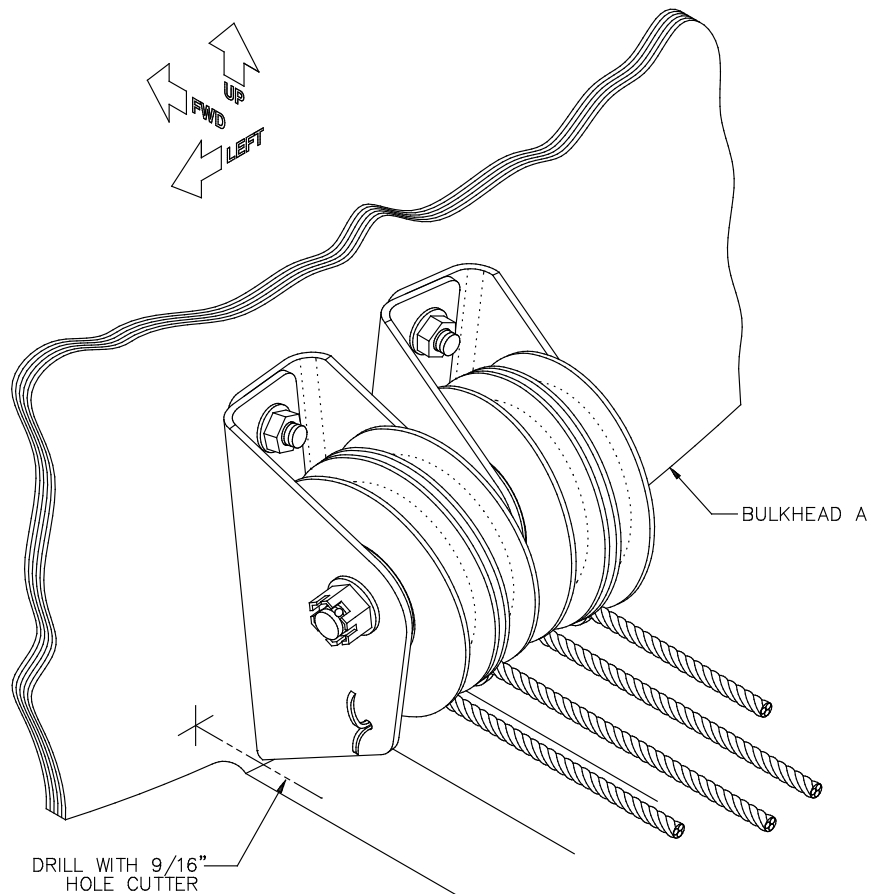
Drilling the Trim Cable Hole in Bulkhead A
